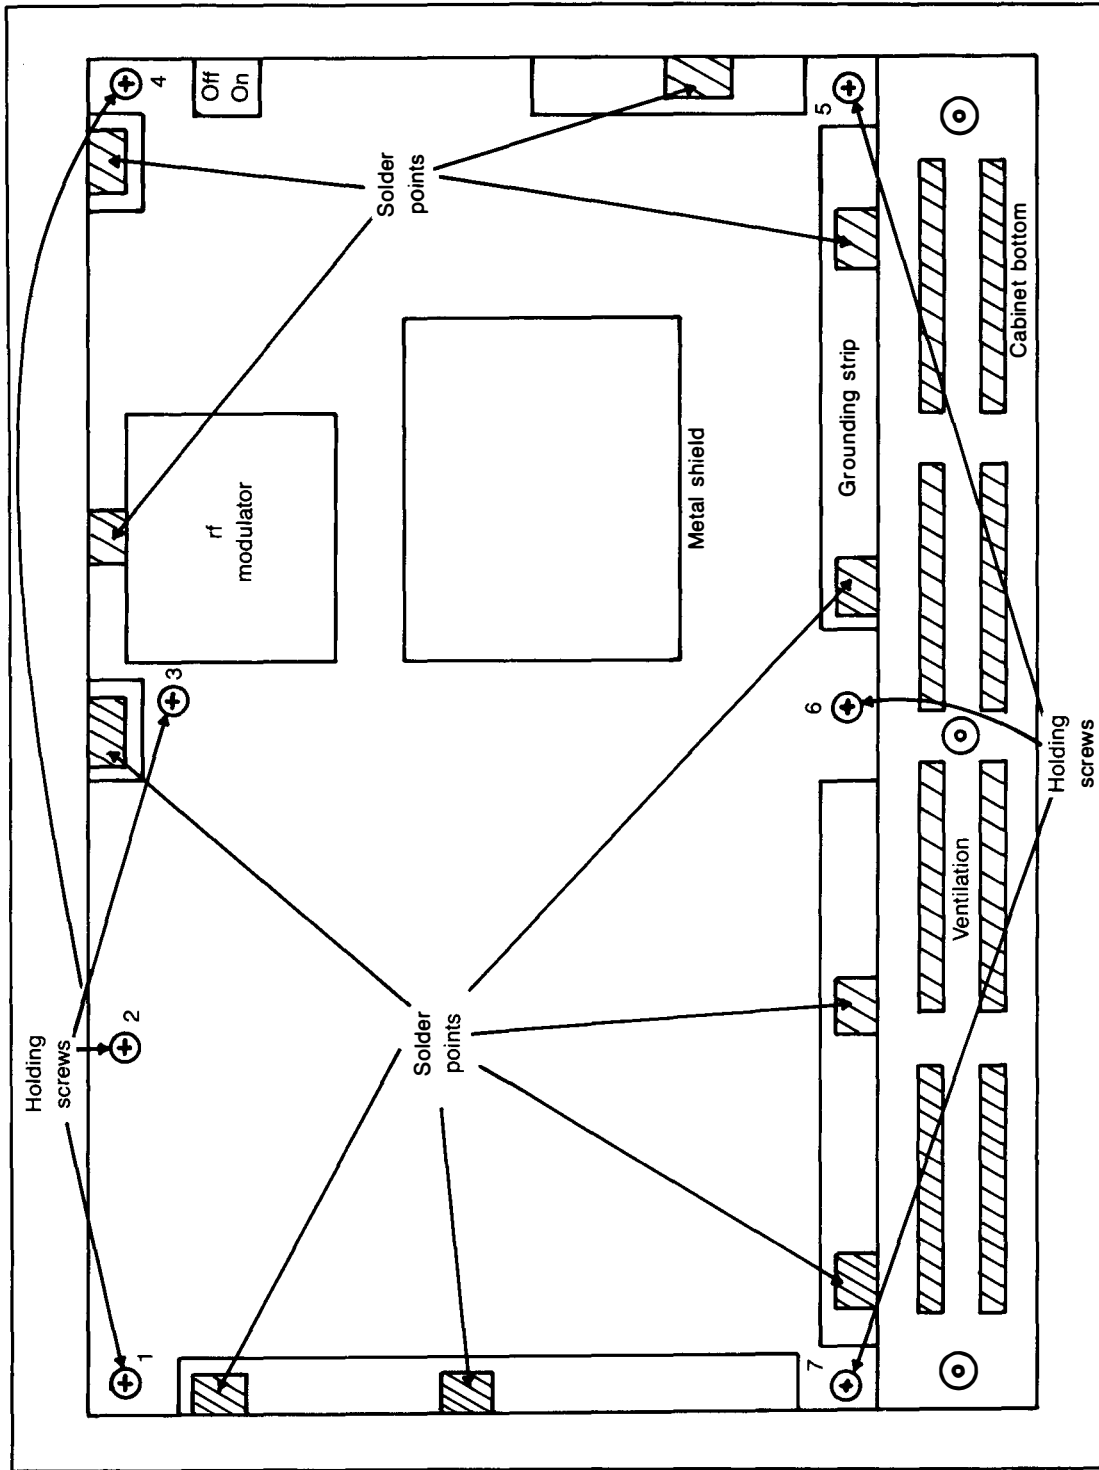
When an unsocketed chip must be replaced, the print board must be removed. This is accomplished by taking out these 7 Phillips head holding screws and desoldering the 10 folded over tabs.
